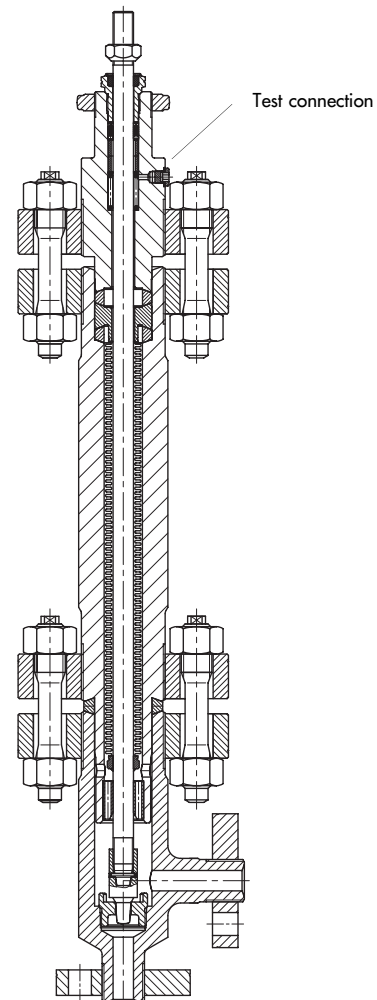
· Type 3259 Valve with metal bellows seal and test connection
